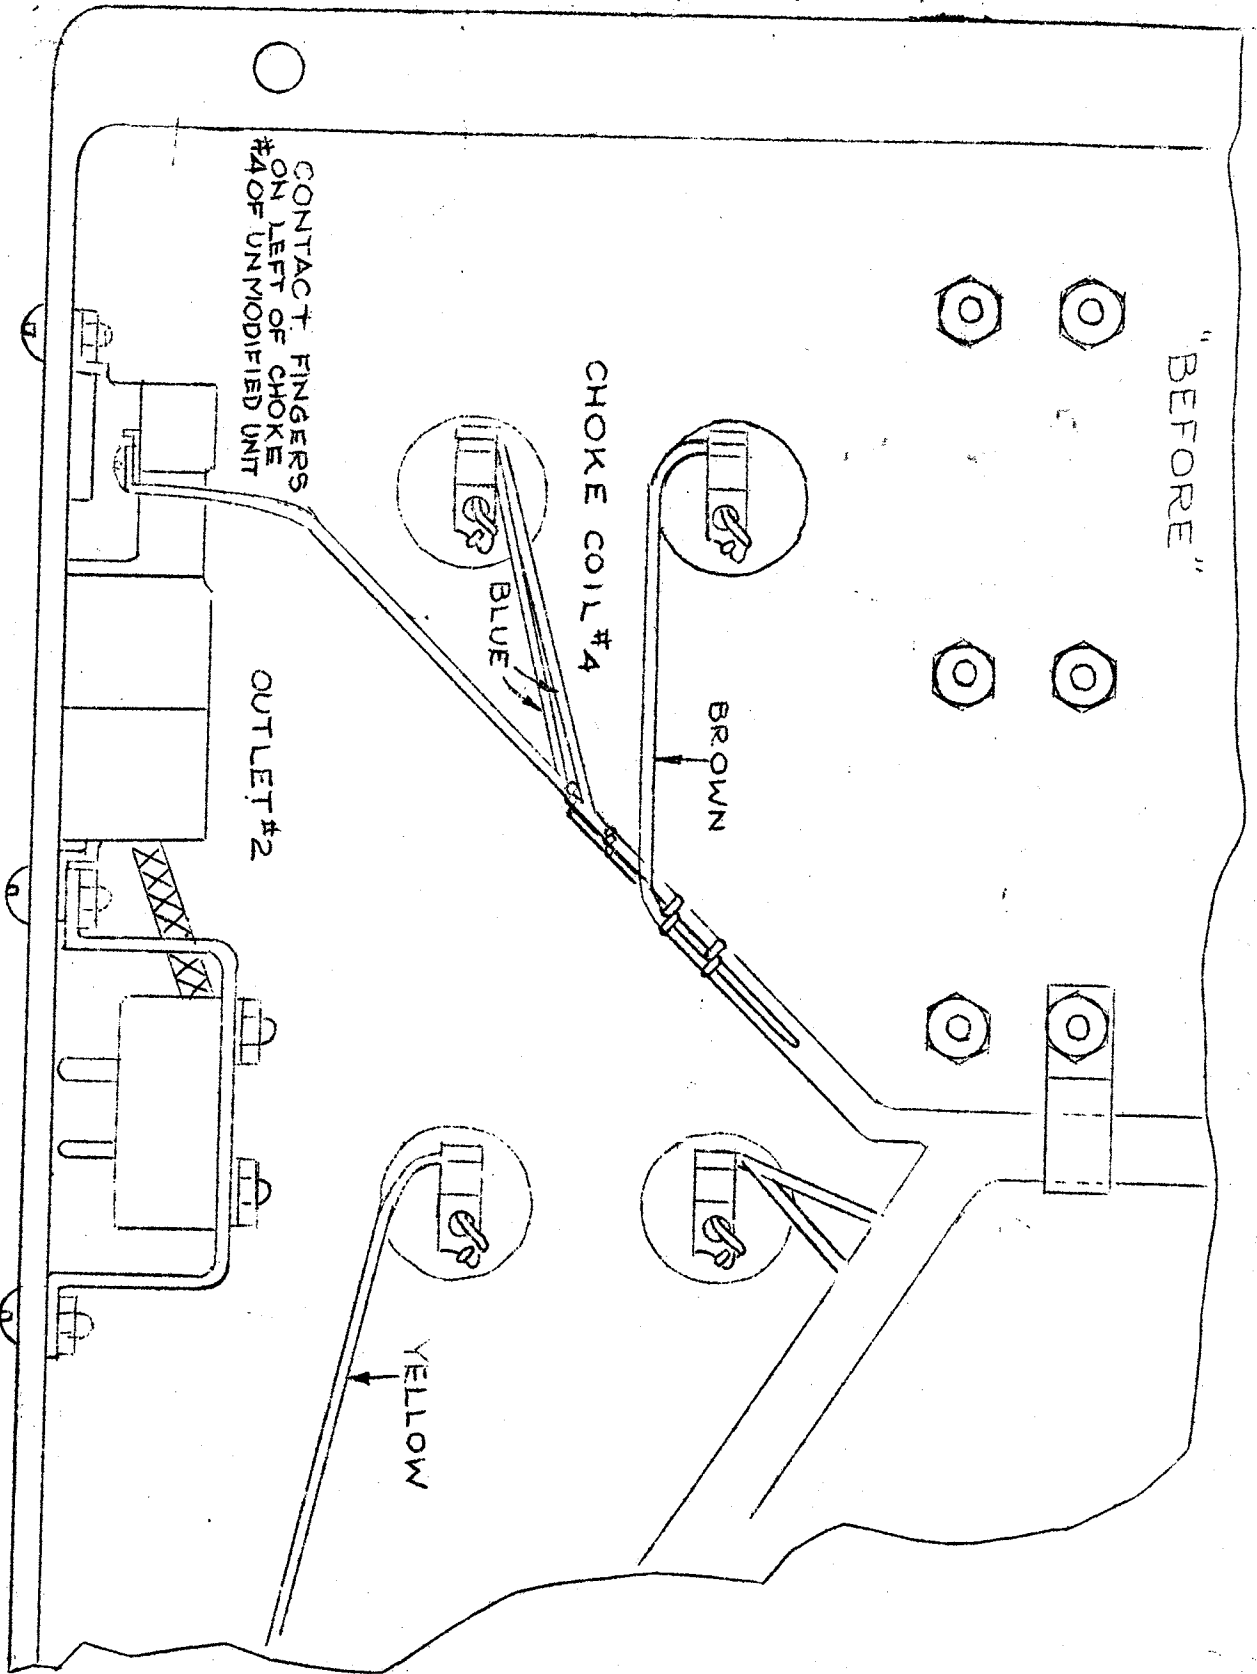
Bottom View of Rear Left-hand Corner of #404 Socket Power Unit Before Modification.
